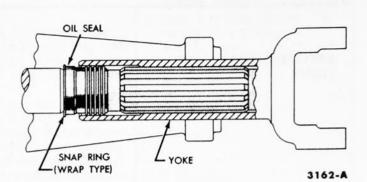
Output Shaft and Front U-Joint Yoke Spline Seal
